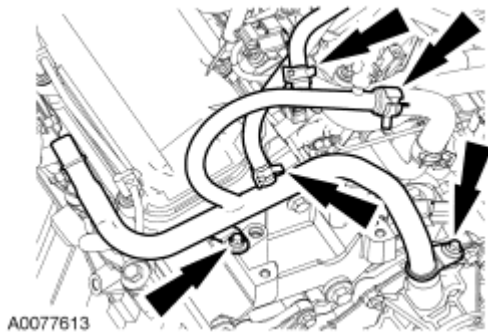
Locating Coolant Pump Outlet Tube Bolts
